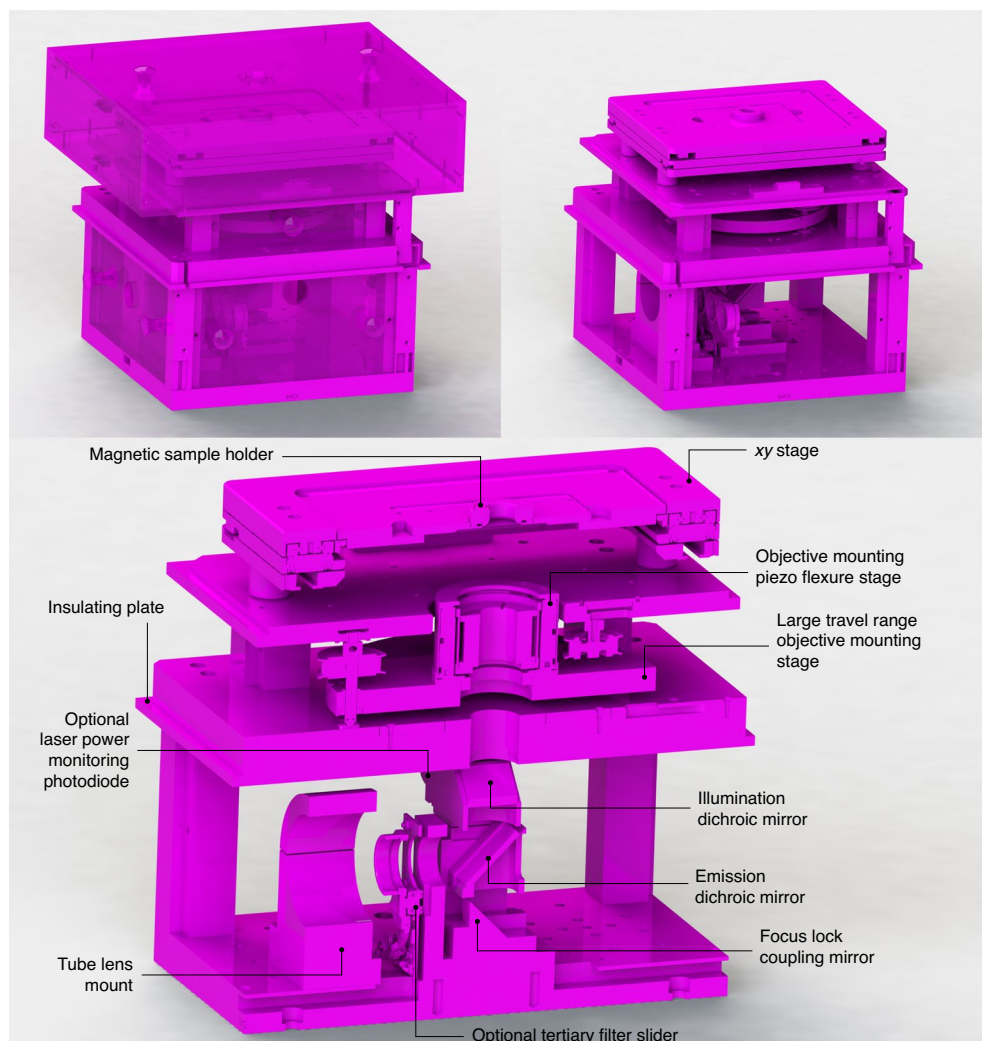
| The fully assembled inverted microscope body. Top/left: the microscope body with covers installed for laser safety and to aid thermal stability. Top/right: the microscope body with covers removed. Bottom: a cut-away view of the microscope body showing its various motion control, optical and optomechanical aspects. The various optical components including high numerical aperture (NA) objective lens (omitted, mount shown) and dichroic mirrors for coupling the optical paths/in/out are situated below an xy stage. An optional filter slider can be included in the infinity space before a tube lens (omitted, mount shown) produces a primary image outside of the microscope body.
